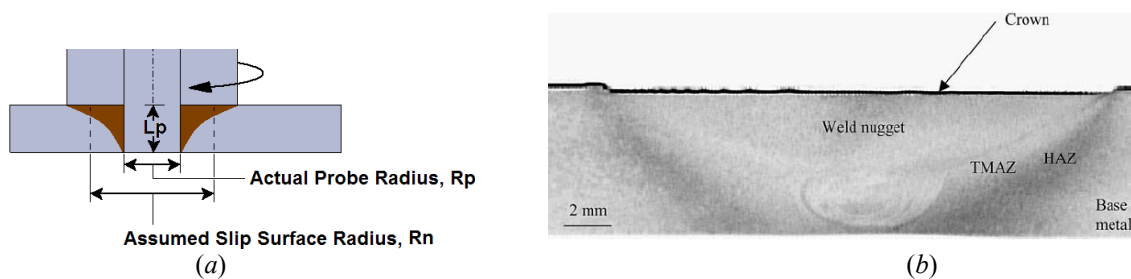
Weld nugget parameters (a) and *weld nugget* macrograph (Chen and Kovacevic, 2003) (b).
